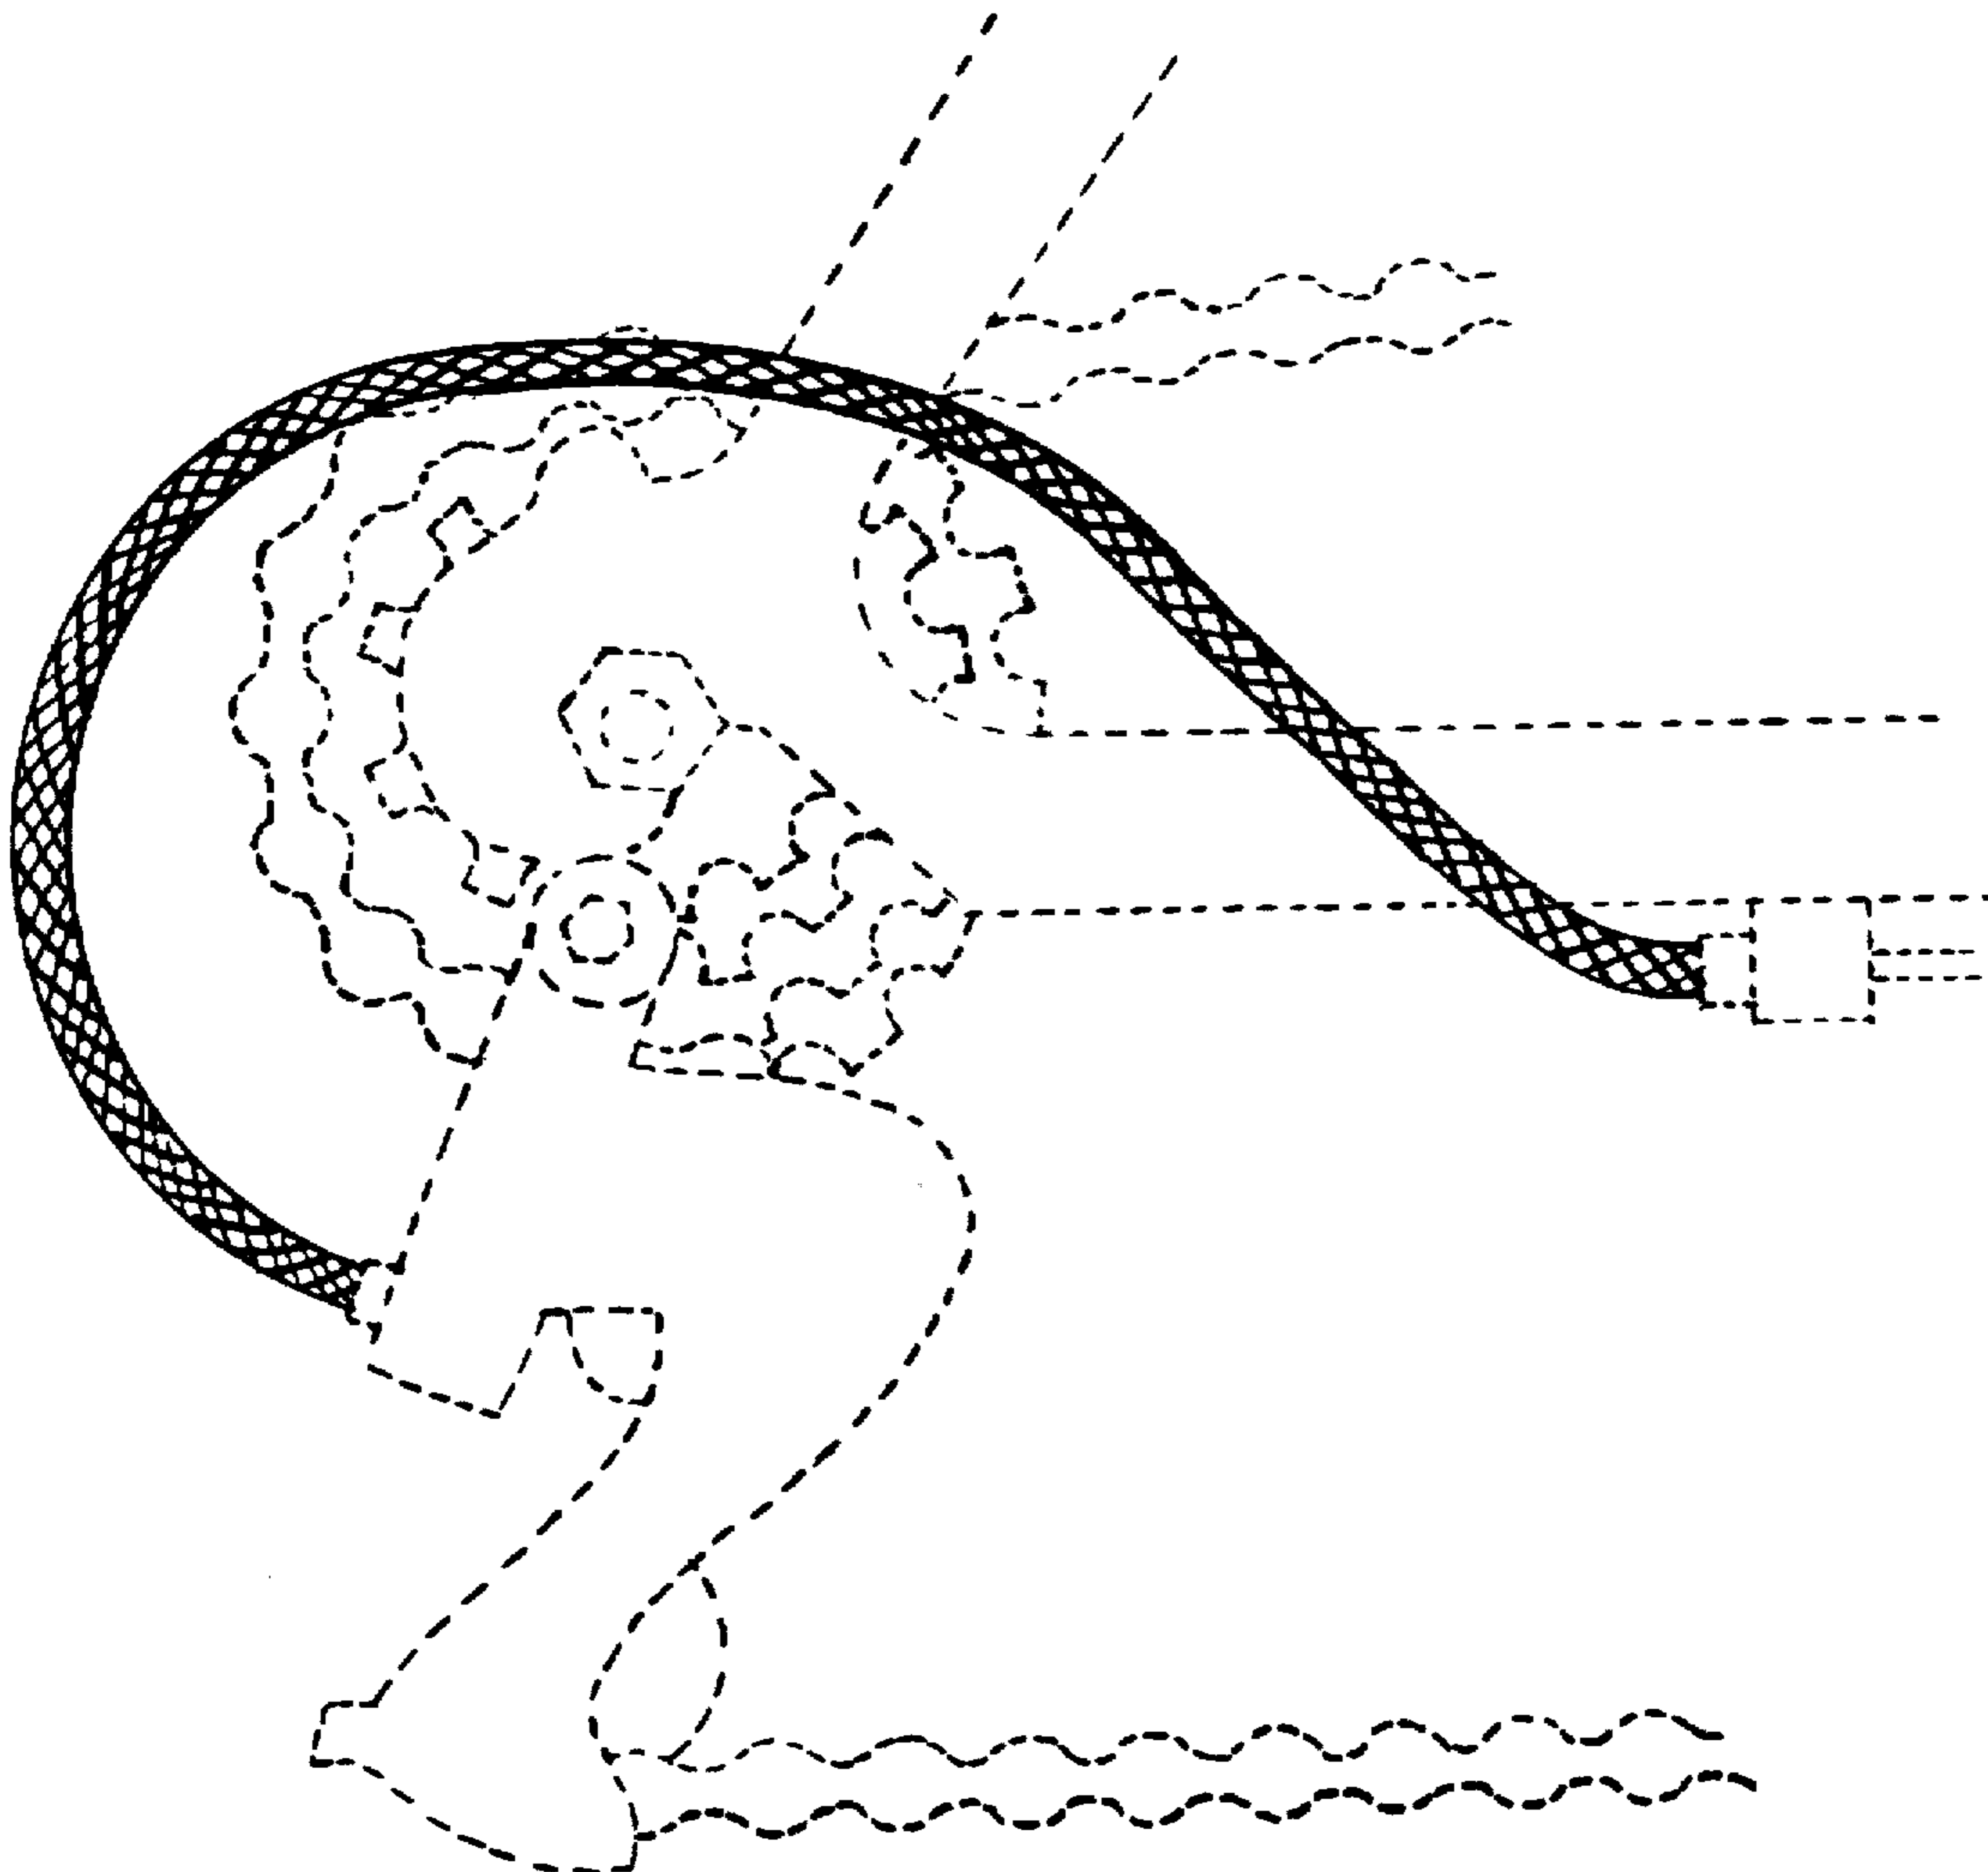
is a side elevational view of a mechanical cable housing showing my new design, the derailleur gearshift mechanism shown in broken lines are for illustrative purposes only and form no part of the claimed design; FIG. 2 is an enlarged fragmentary top plan view thereof; and, FIG. 3 is a right end view of the bicycle mechanical cable housing of the present invention, the left end view being a mirror image thereof.
